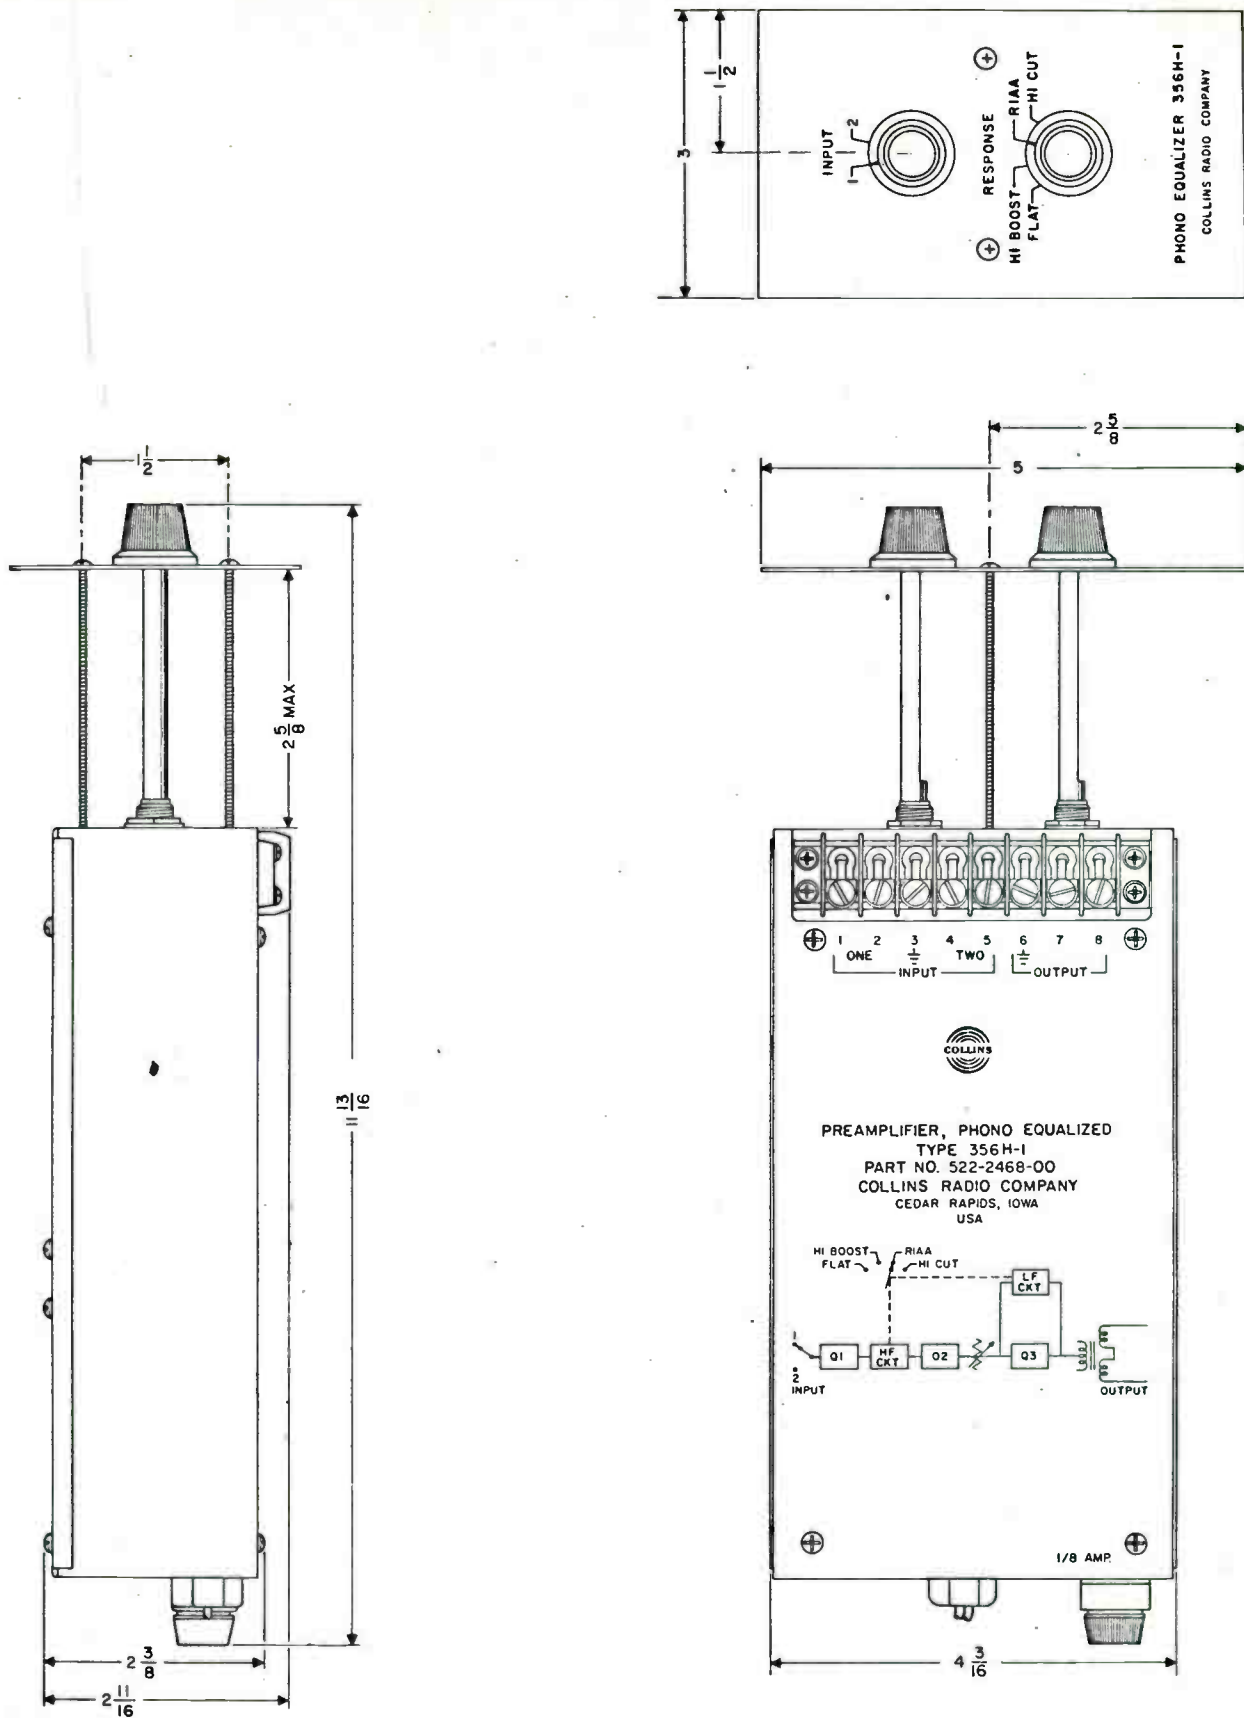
356H-1 Phono Equalizer, Outline and Mounting Dimensions
